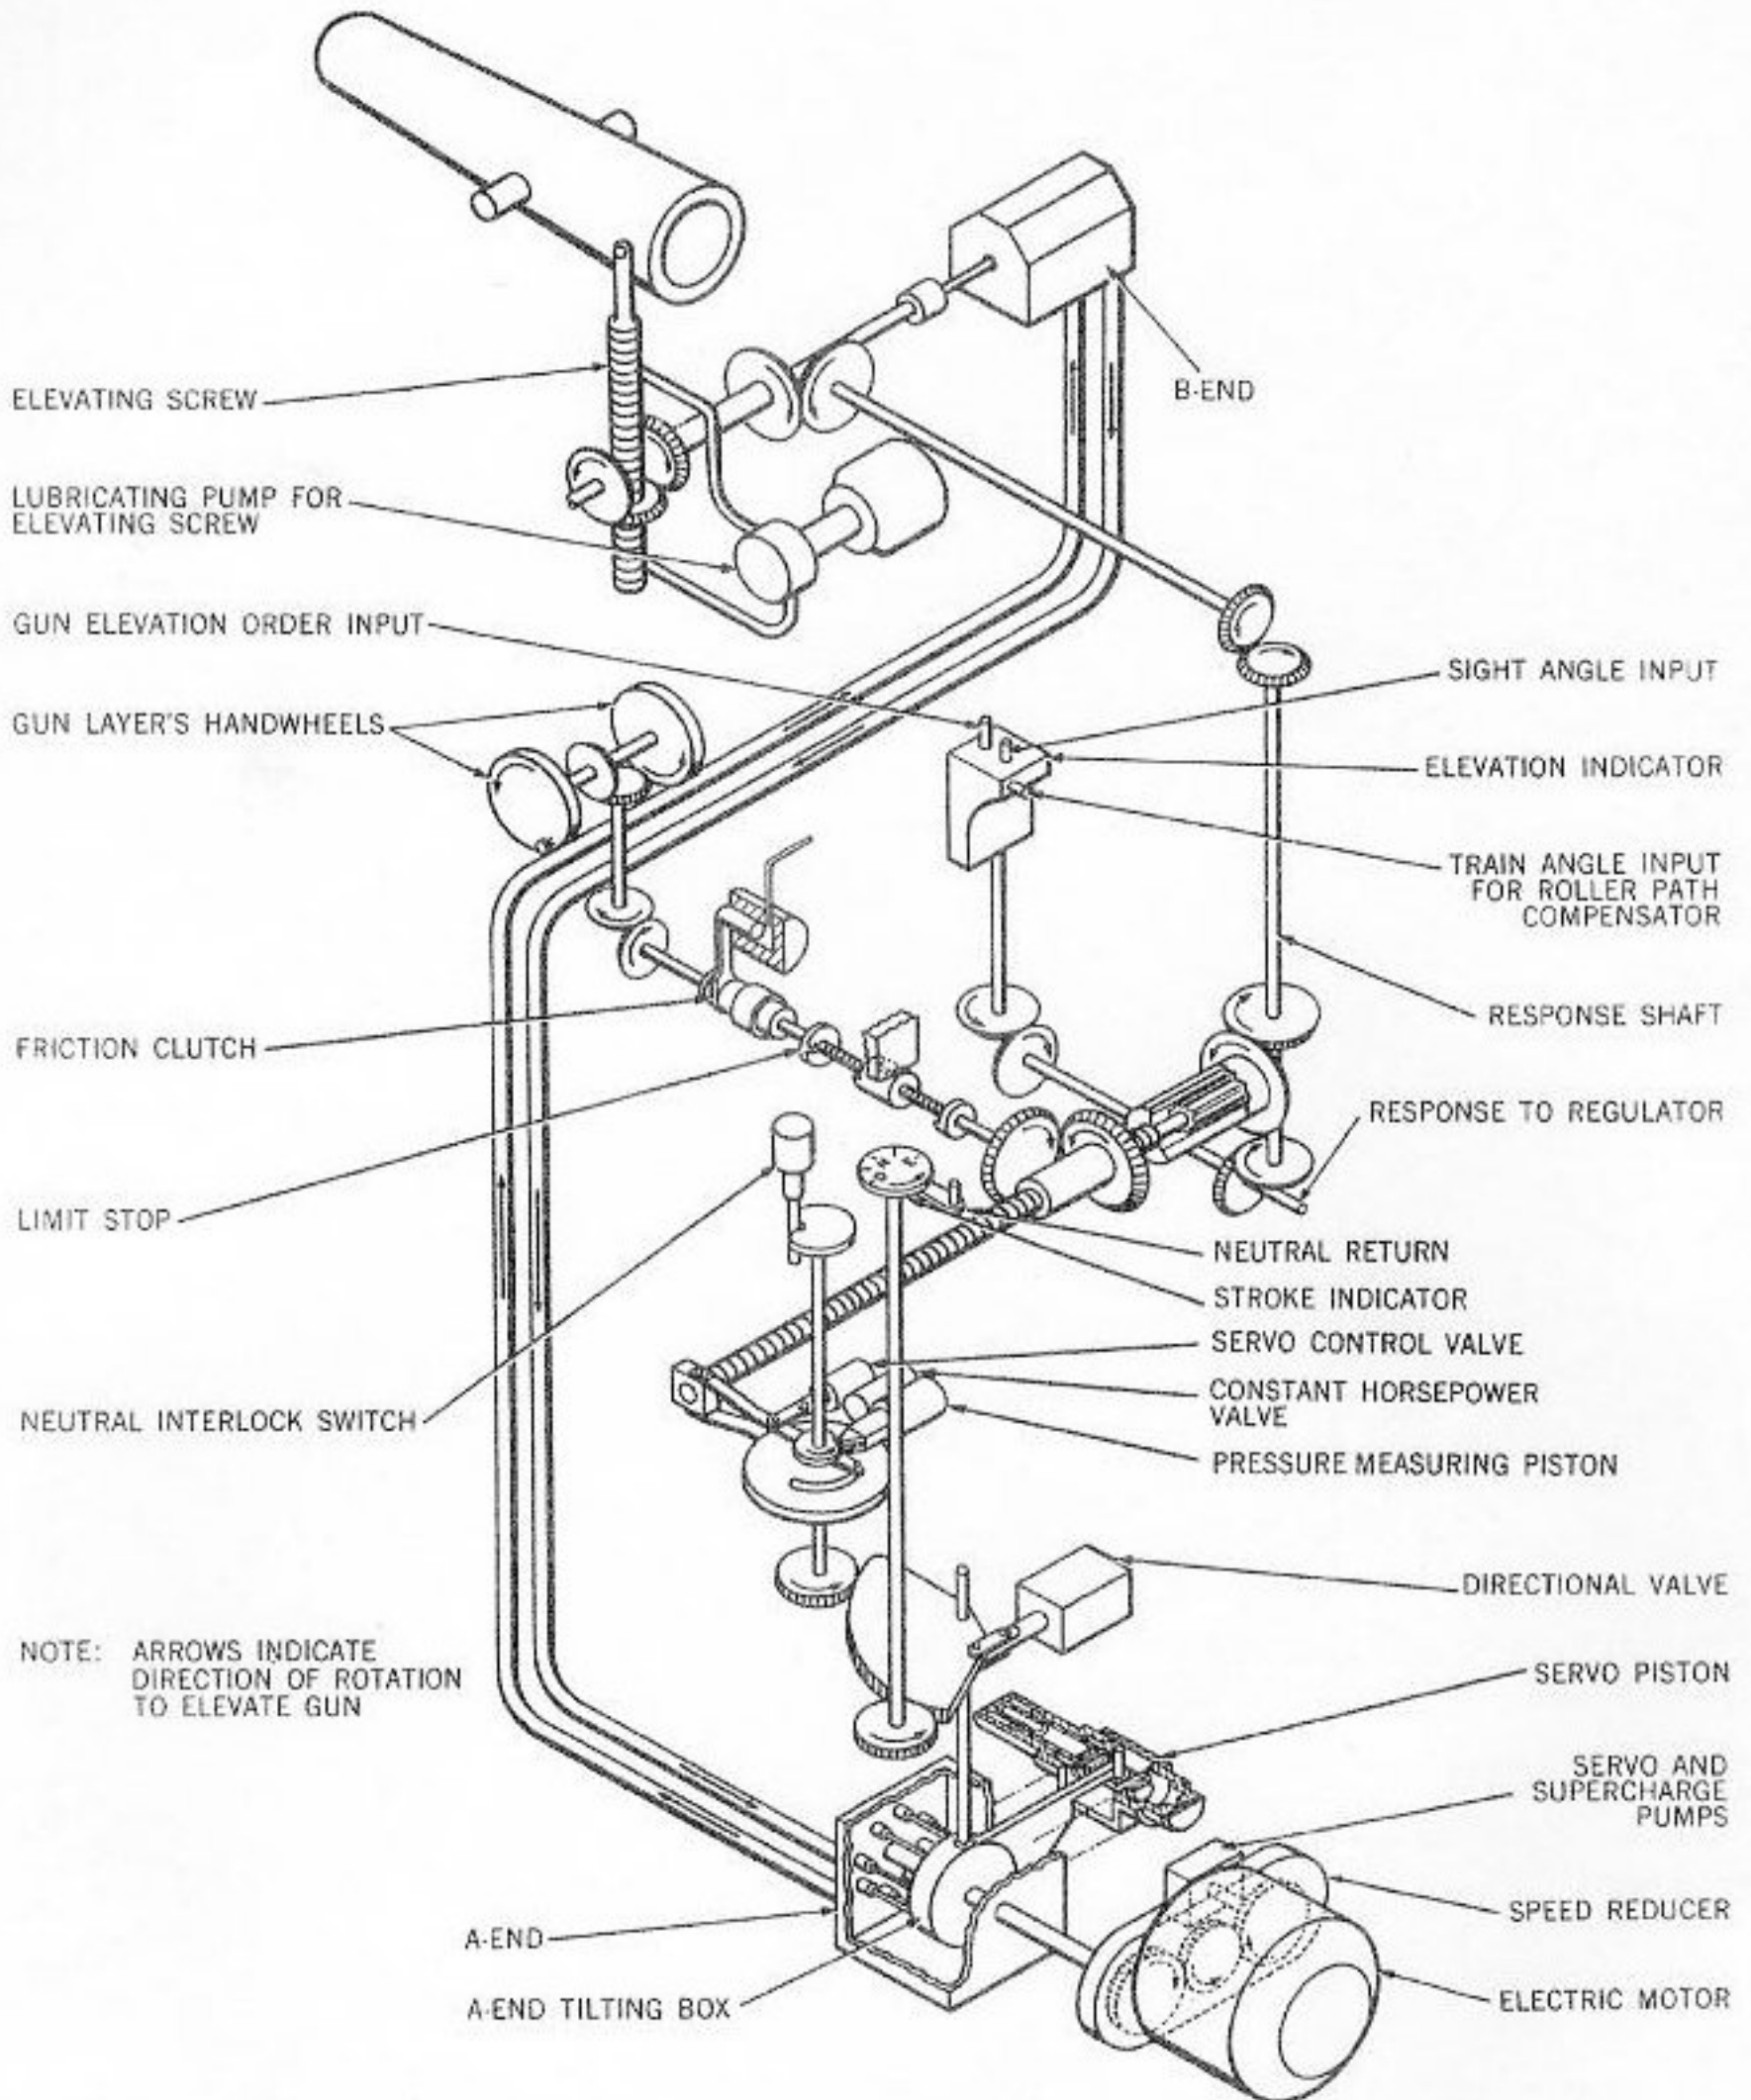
16-inch Elevating Gear Mk 5 Mod 0, Schematic Arrangement
